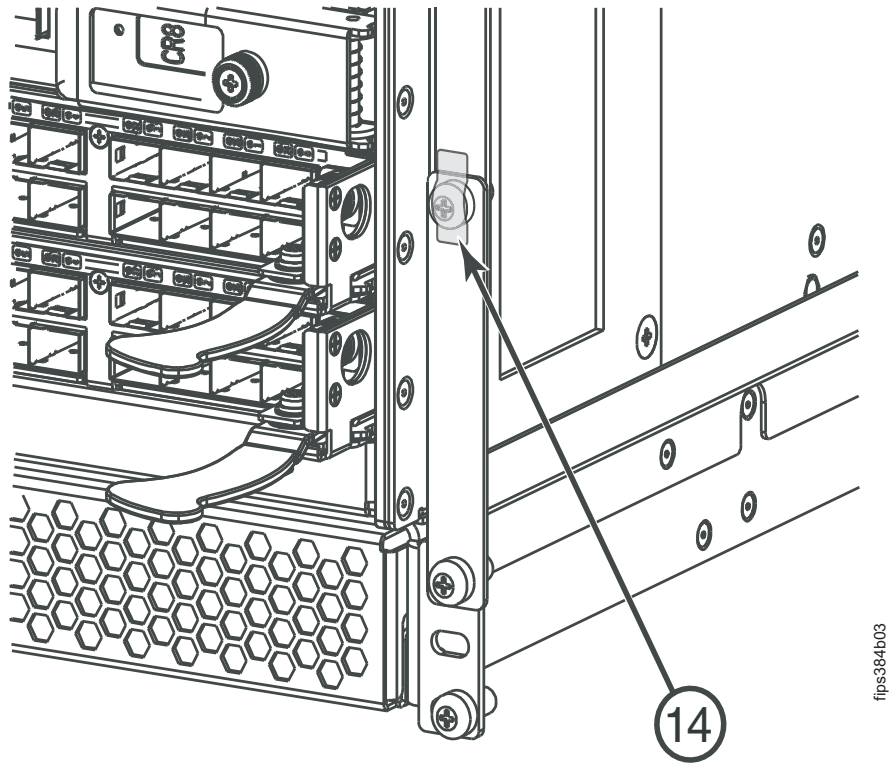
2499-192 port side bracket and seal location detail (right port view)
